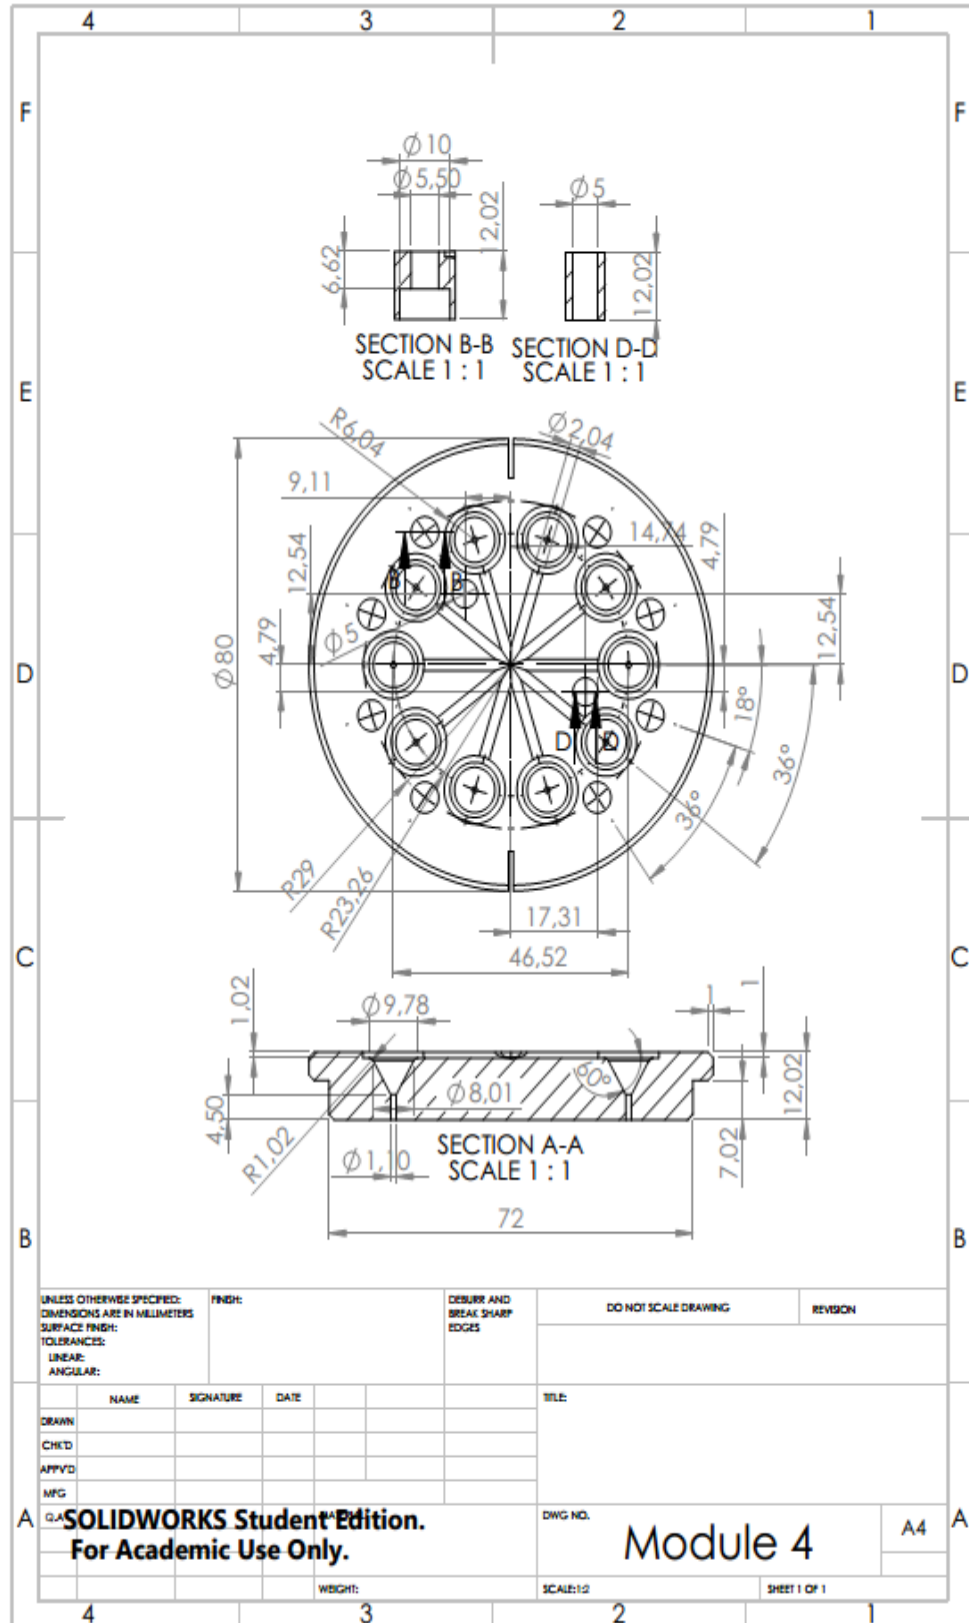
2D drawing of the module 4 of the filament coextrusion die.
